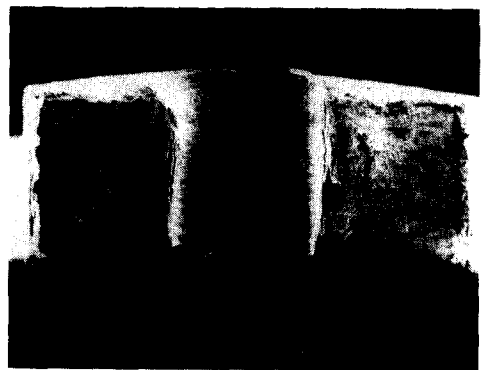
Fractograph of 34% cold worked/center-holed specimen after CERT.
